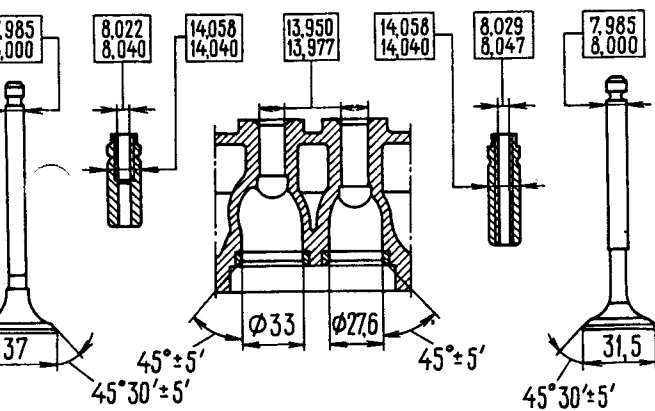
Basic Dimensions of Cylinder Head, Valves and Valve Guides
